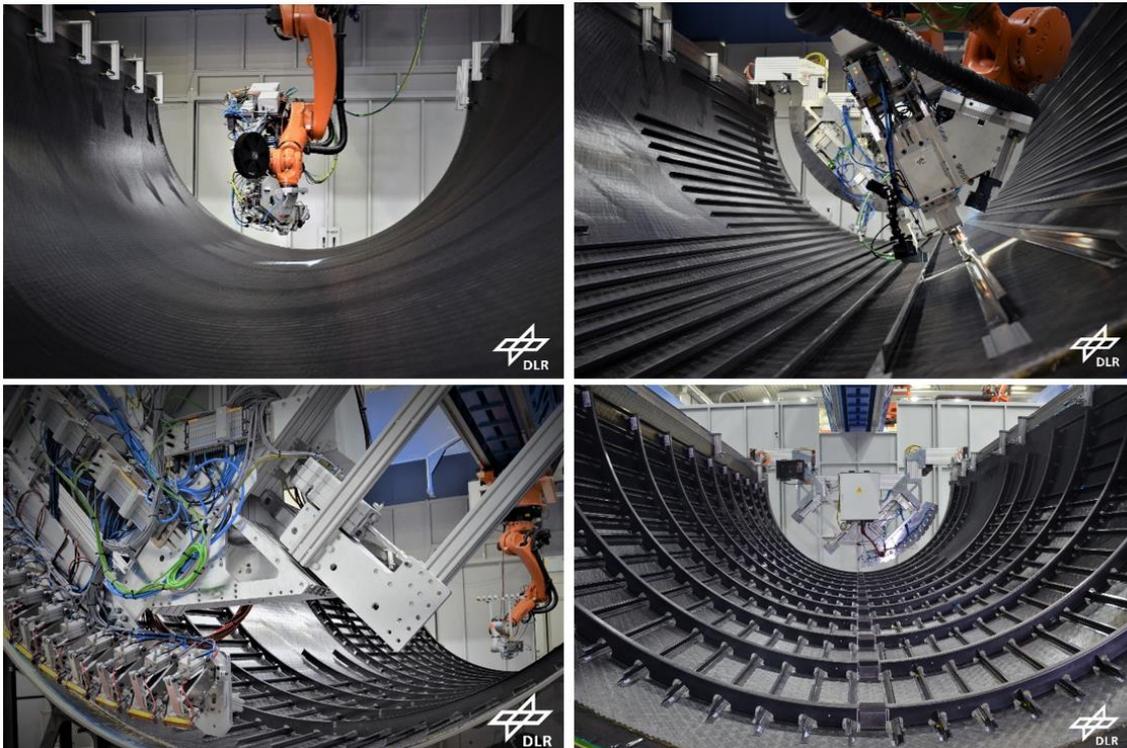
MFFD upper shell production: in-situ lay-up of skin (top left), continuous ultrasonic welding of stringers (top right), resistance welding of frames with welding bridge (bottom left) final MFFD upper shell section (bottom right)
